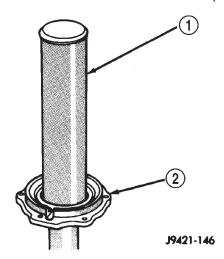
Installing Oil Seal In Front Bearing Retainer
